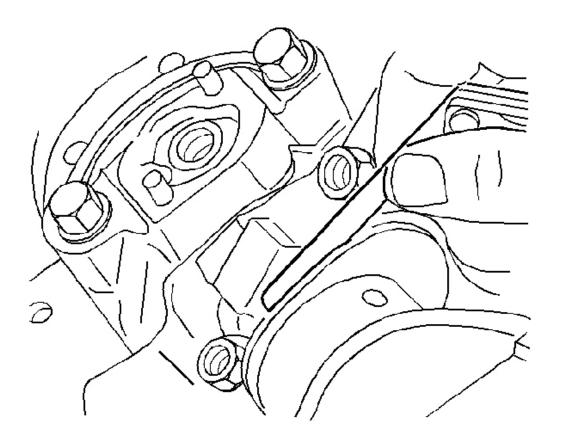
Measuring Connecting Side Clearance Courtesy of GENERAL MOTORS CORP.
